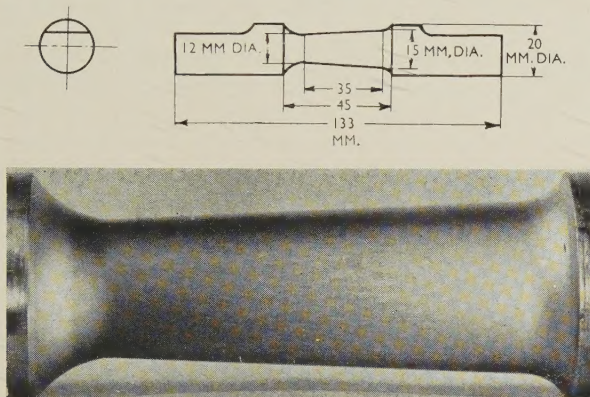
Dimensions of Specimen and Flecking Parallel to Axis in Torsion Test.
